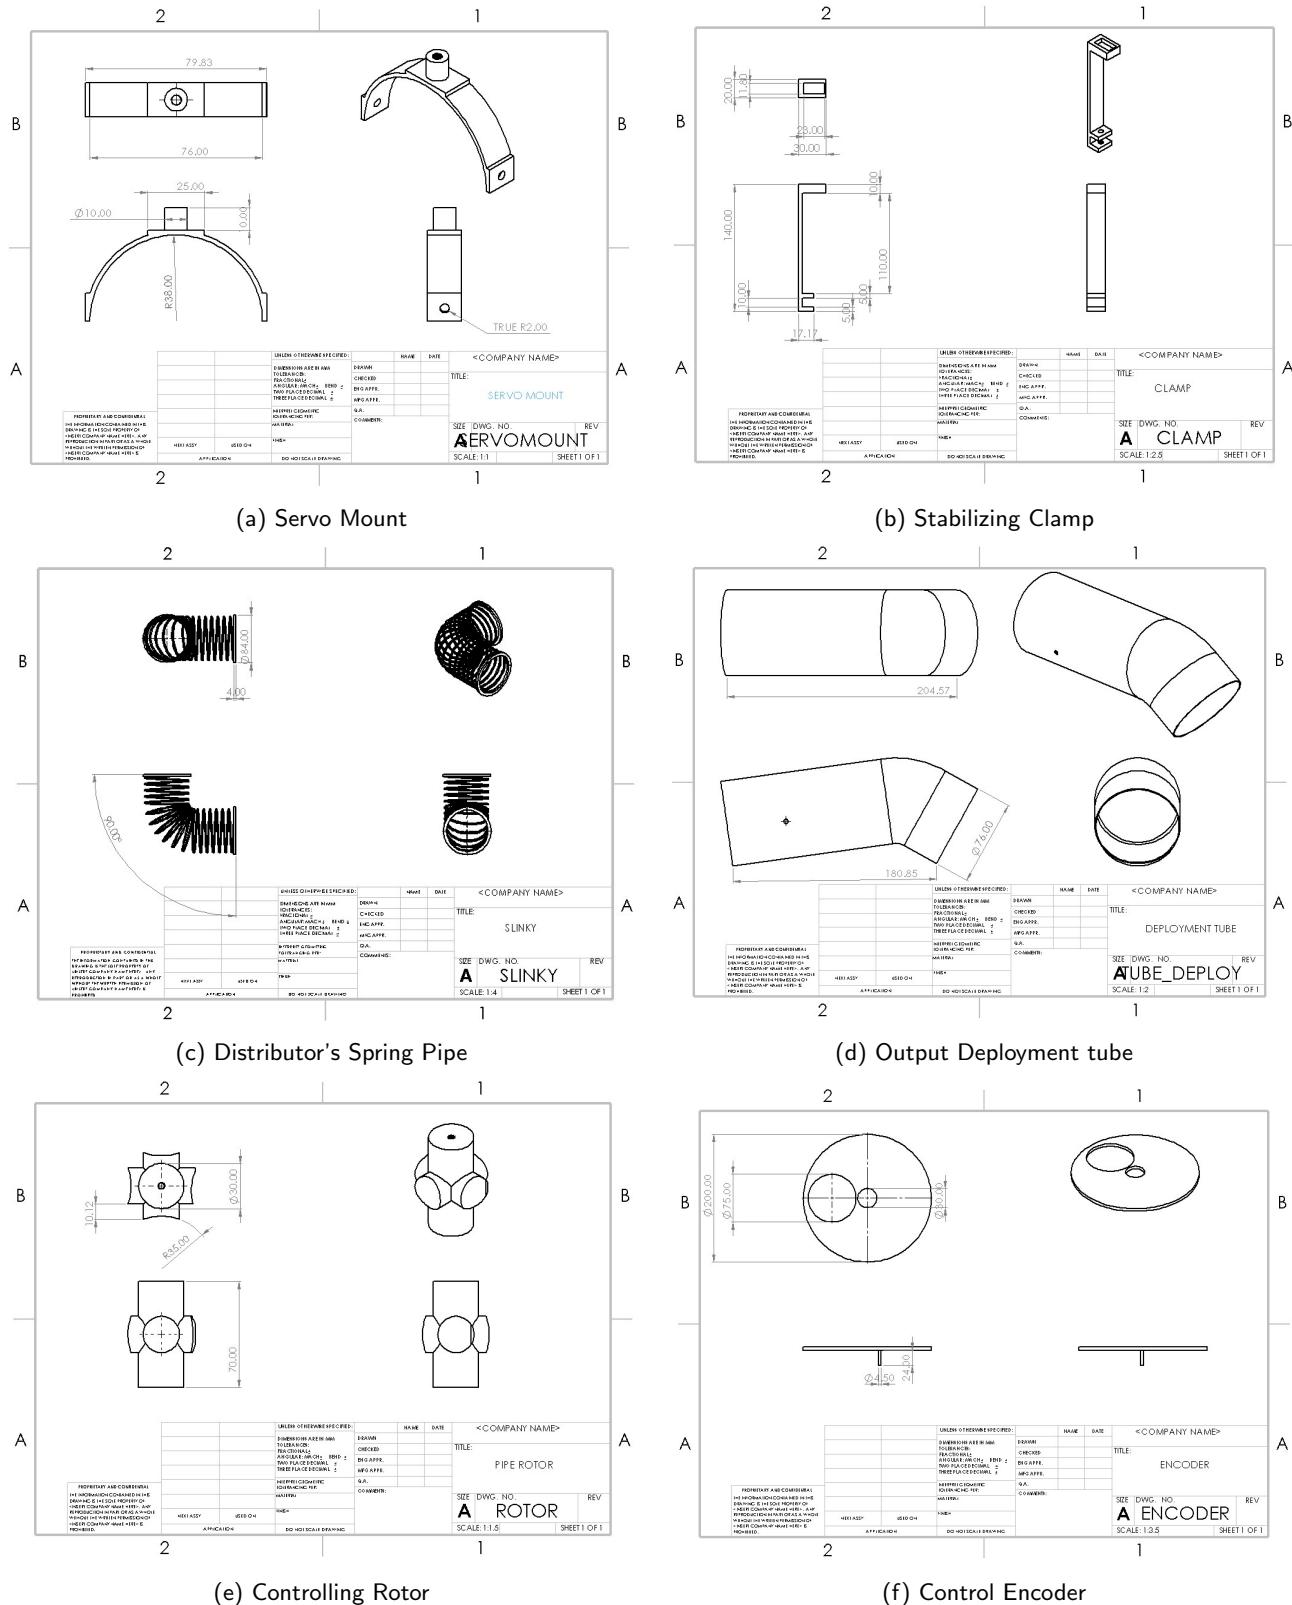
Assembly drawings of the deployment tube and encoder system.
